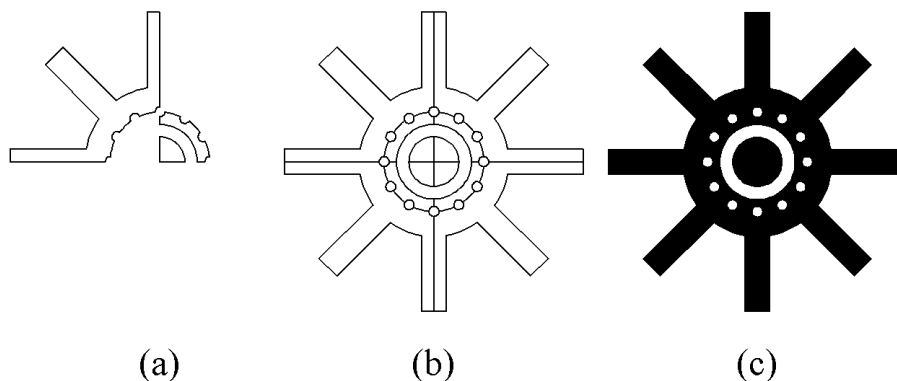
Defining the mask layout for the idler gear using only a positive mask set.
